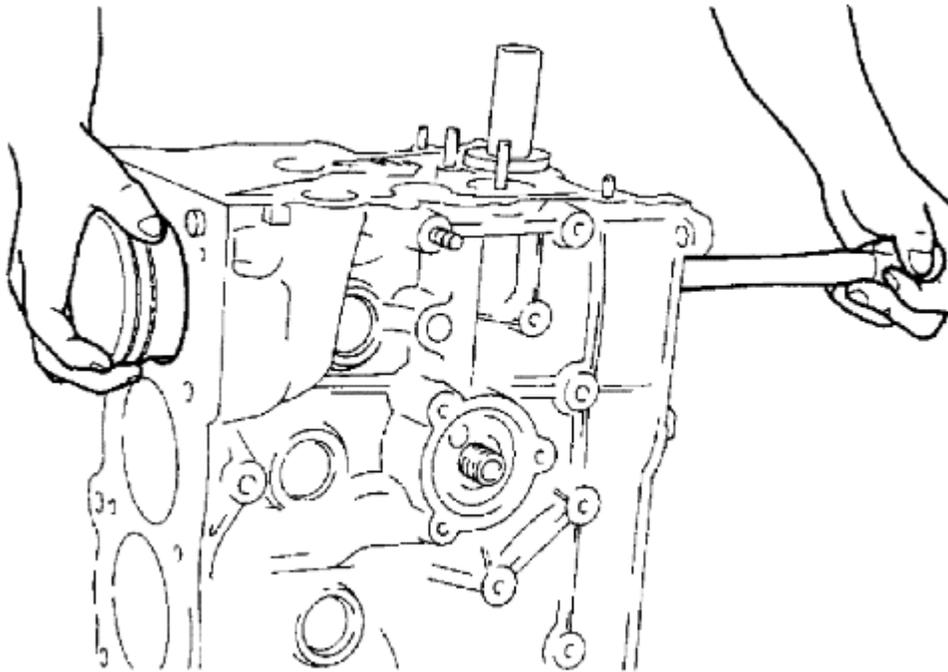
Pushing Piston And Connecting Rod Assembly Using Suitable Tool
